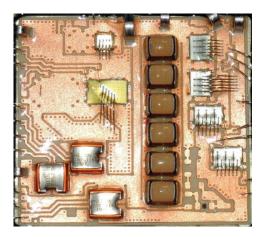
Audi DC/DC Converter: IGBT Assembly
